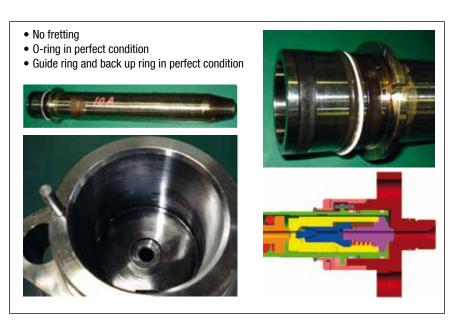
Fuel valve with guide rings. Inspection after 2,000 hours in service on an S90ME-C9.2
